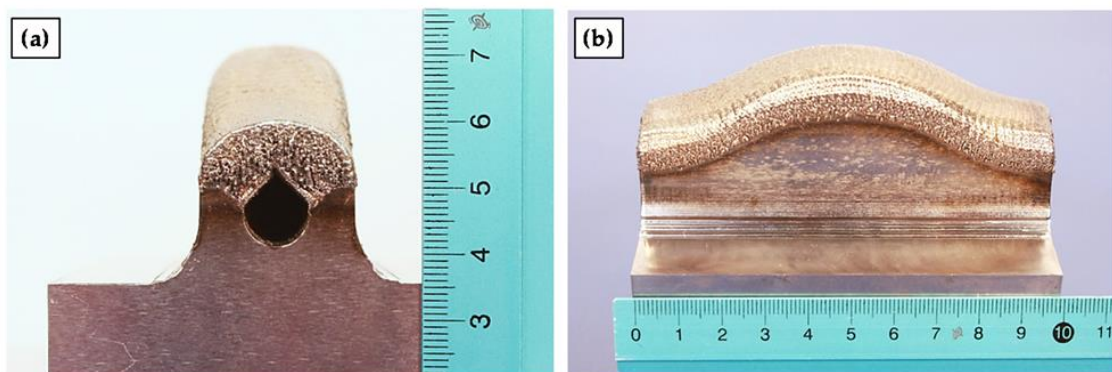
Colling channel manufactured using L-DED [34], (a) Front view, (b) Lateral view.
